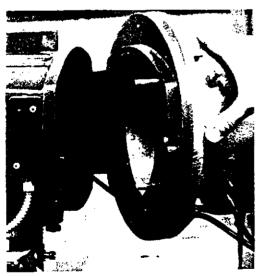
Hinged Gas Manifold Assembly shown in open position
